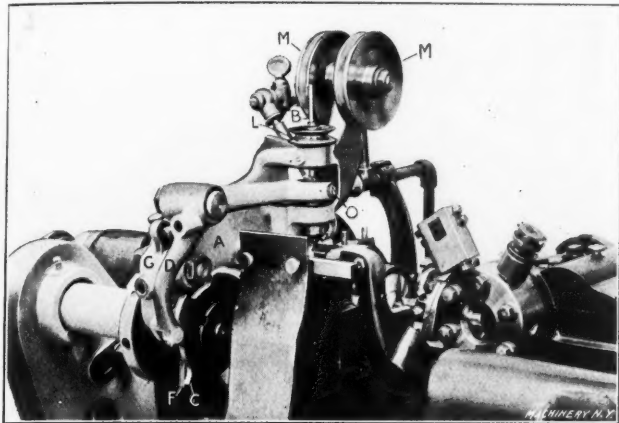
Front View of the Index Drilling Attachment, placed on a No. 00 B. & S. Automatic Screw Machine
